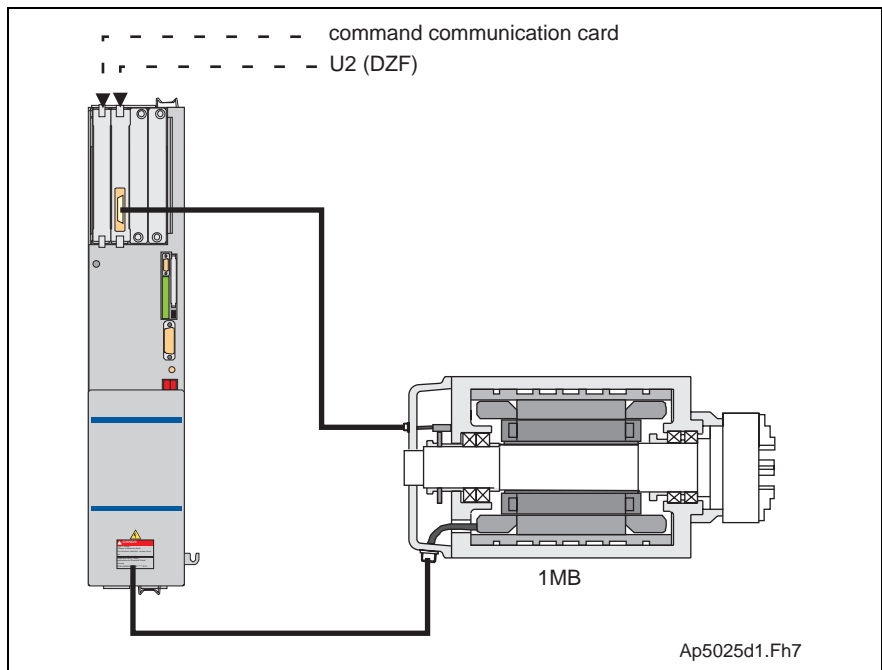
1MB motor with gear wheel encoder with 1Vpp signals on a DZF03.1M plug-in module
